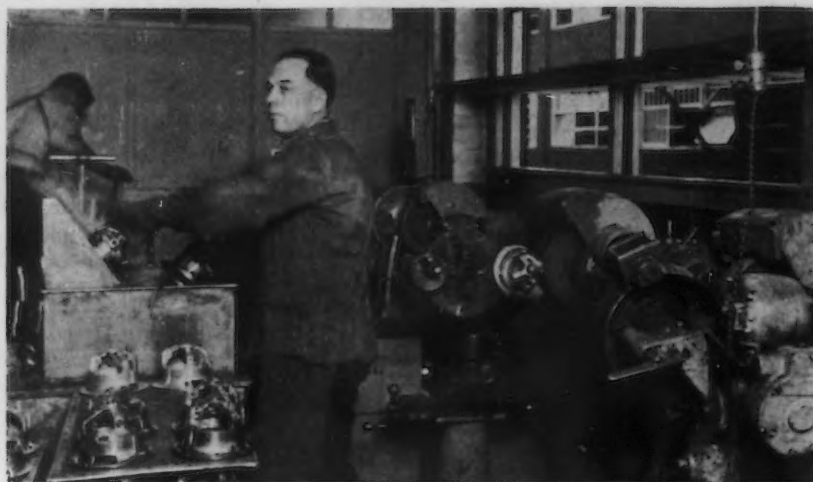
Semi-automatic polishing of cylindrical motor housings.
